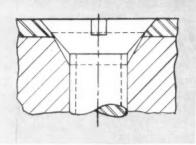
This sketch shows an assembled view of a screw in a hole which has been drilled and countersunk with a center drill of the type that is illustrated in Fig. 10.
